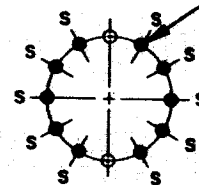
DETAIL A - TYPICAL SCREW PATTERN FOR ITEM 3.
